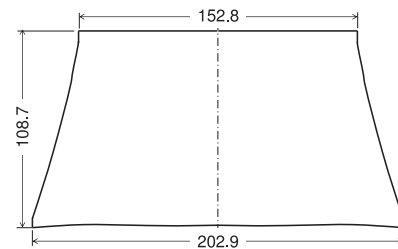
Two-dimensional guide-vane geometry prior to roll bending (dimensions in mm).
